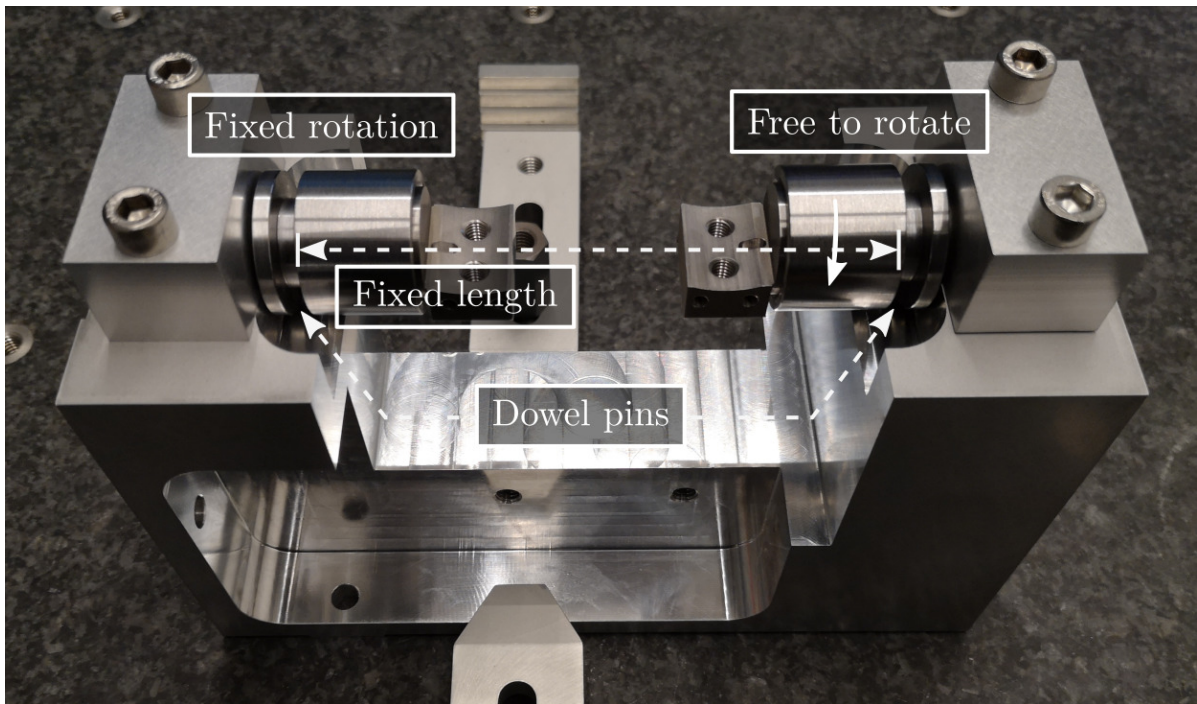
Step 1 - Flexible joints fixed on the cylindrical interface elements
